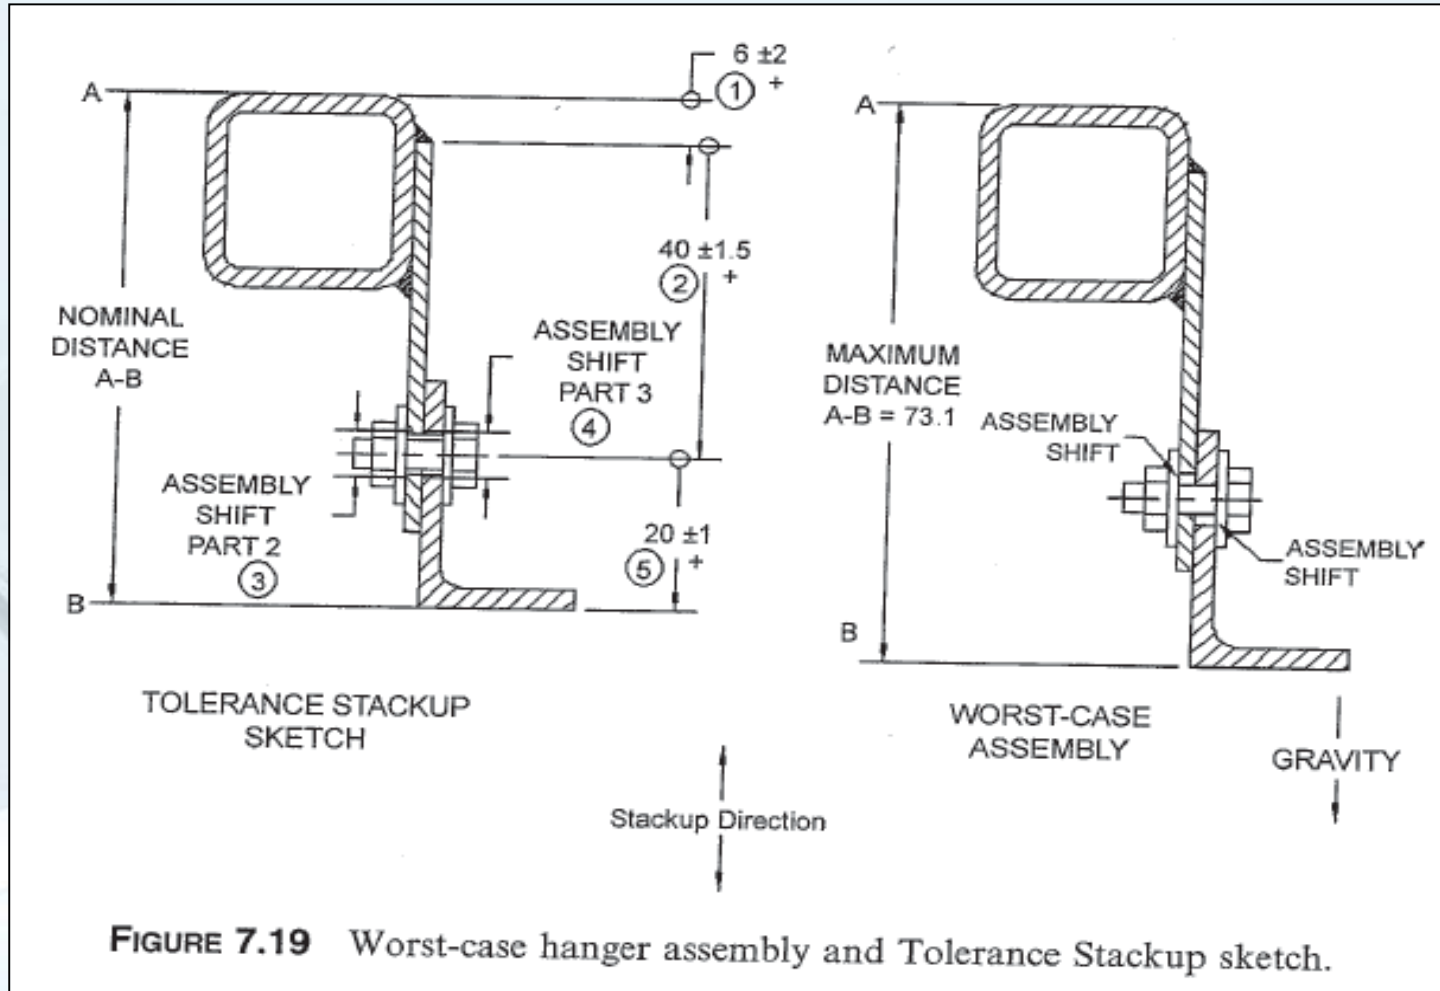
Worst-case hanger assembly and Tolerance Stackup sketch.
